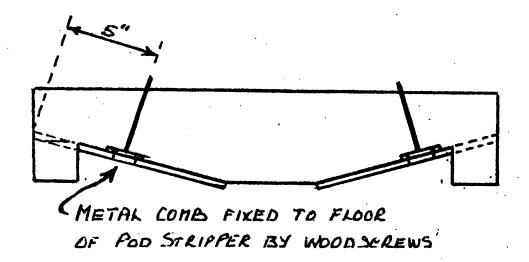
ASSEMBLY DETRILS OF METAL COMB
